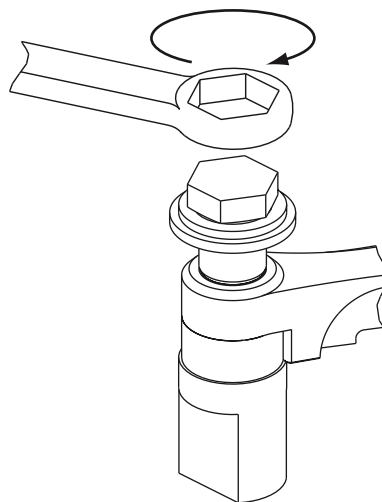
Replace all components in reverse order. Torque arm bolts to 3.4 Nm (30 in-lb).
